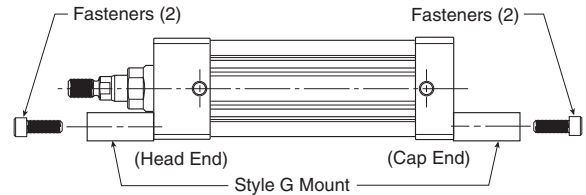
Side End Lug Mounting Kit - Style MS7
